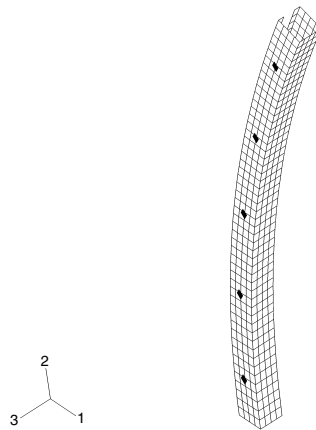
Initial configuration of the box-shaped column showing spot welds.
